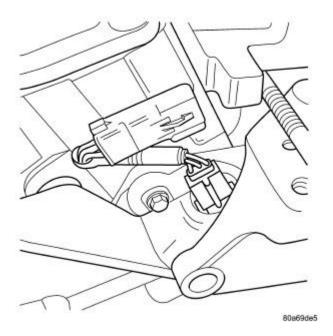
Removing/Installing Camshaft Position Sensor Courtesy of CHRYSLER LLC
